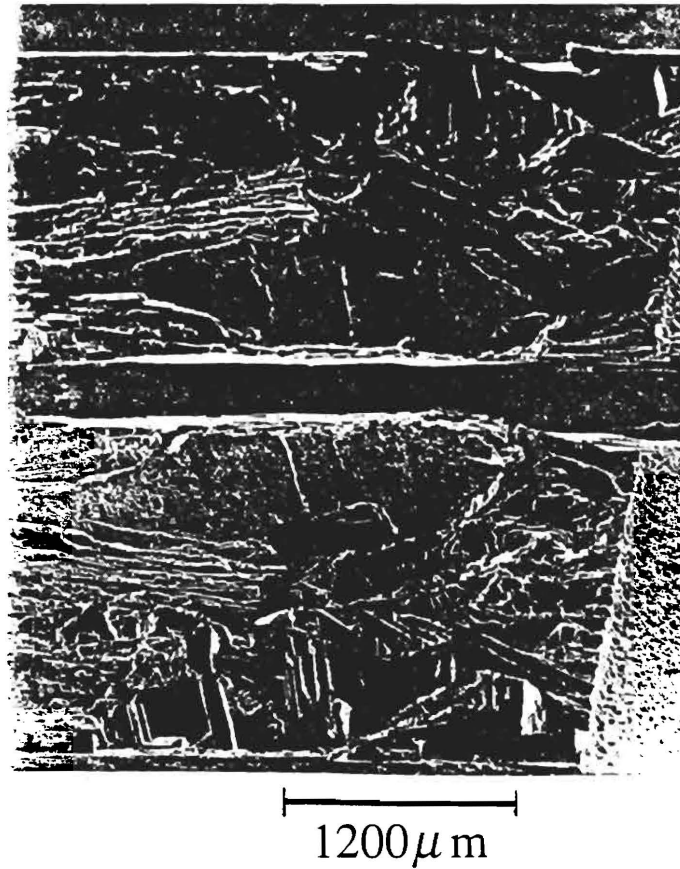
Fracture surface of Al-Li Alloy 2090 specimen. Crack propagation direction is from left to right.
